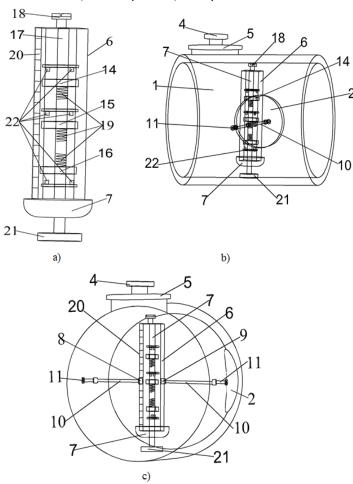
Gas relay and its: a) rectangular beaker; b) front view; c) side view
